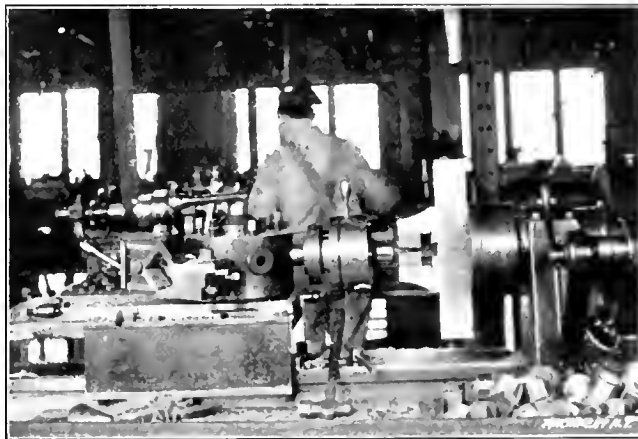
Lathe equipped for Machining Brass Taper Plugs
